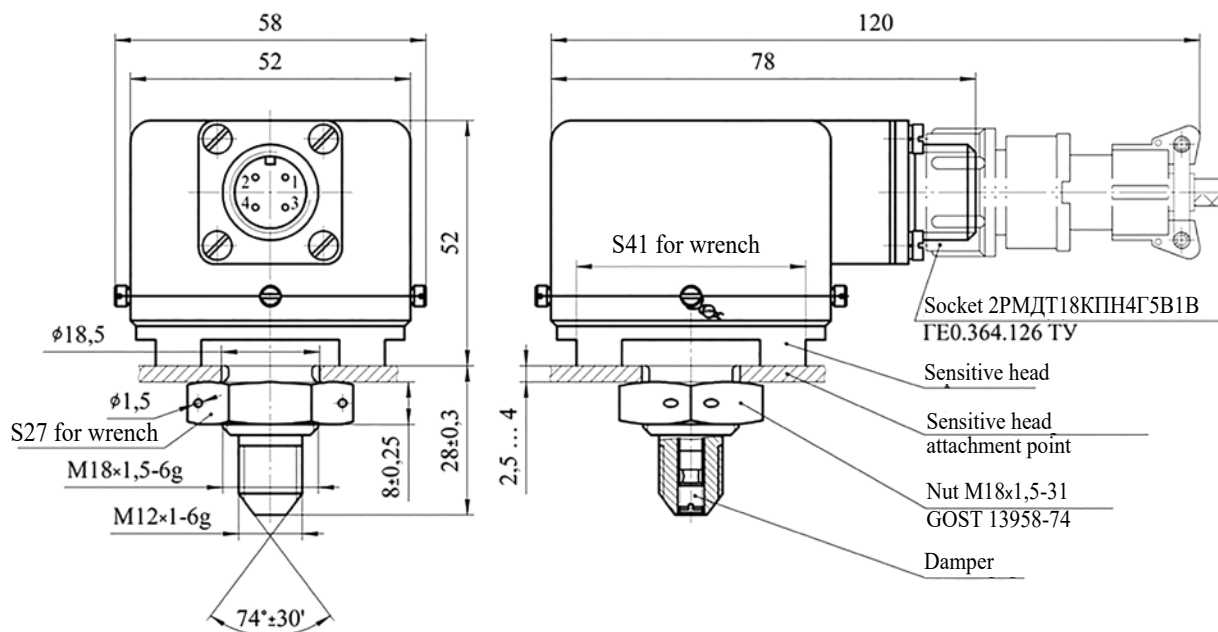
Overall and attachment dimensions of ПД-1 pressure head
